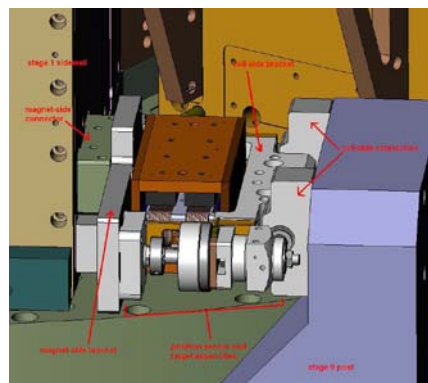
the new horizontal actuator assembly installed on the LASTI prototype.
